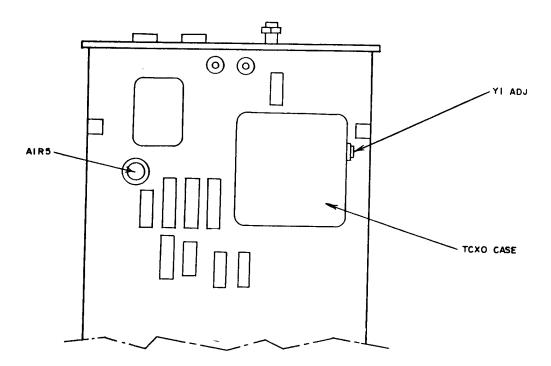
Test instrument - (Hewlett-Packard, Model 5303B) - bottom view.
